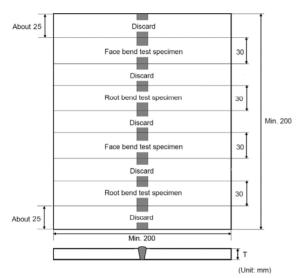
Dimensions and types of test assembly for butt welds (T<12mm)
